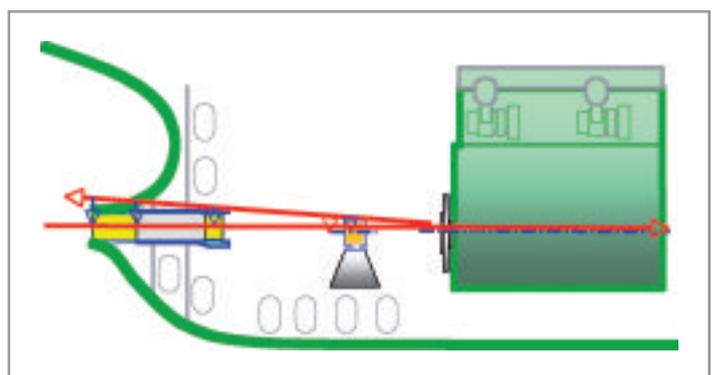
Reference line from stern tube to engine and from engine to stern tube.
